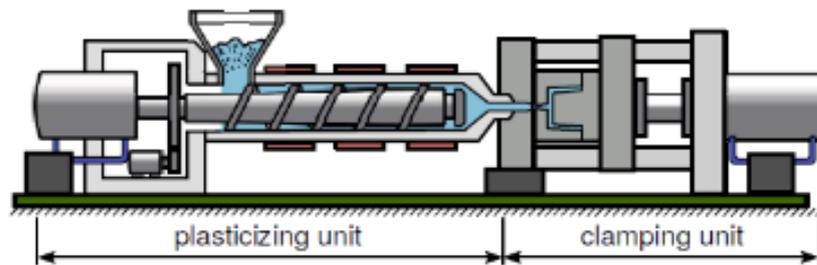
Injection moulding machine (Baum and Anders, 2021).
